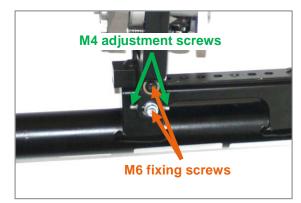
M6 fixing screws and M4 adjustment screws to adjust the angle of the locking plate
